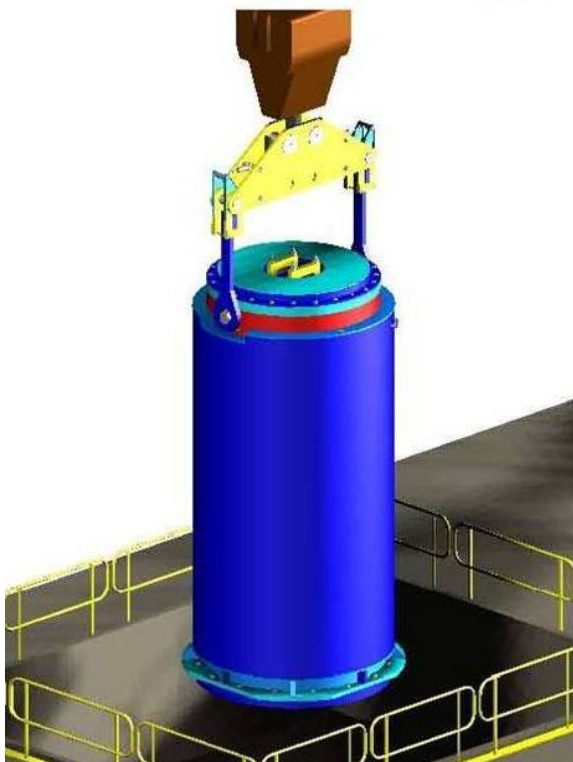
MPC Drying, Backfill and Hi-Trac Top Lid Installation
